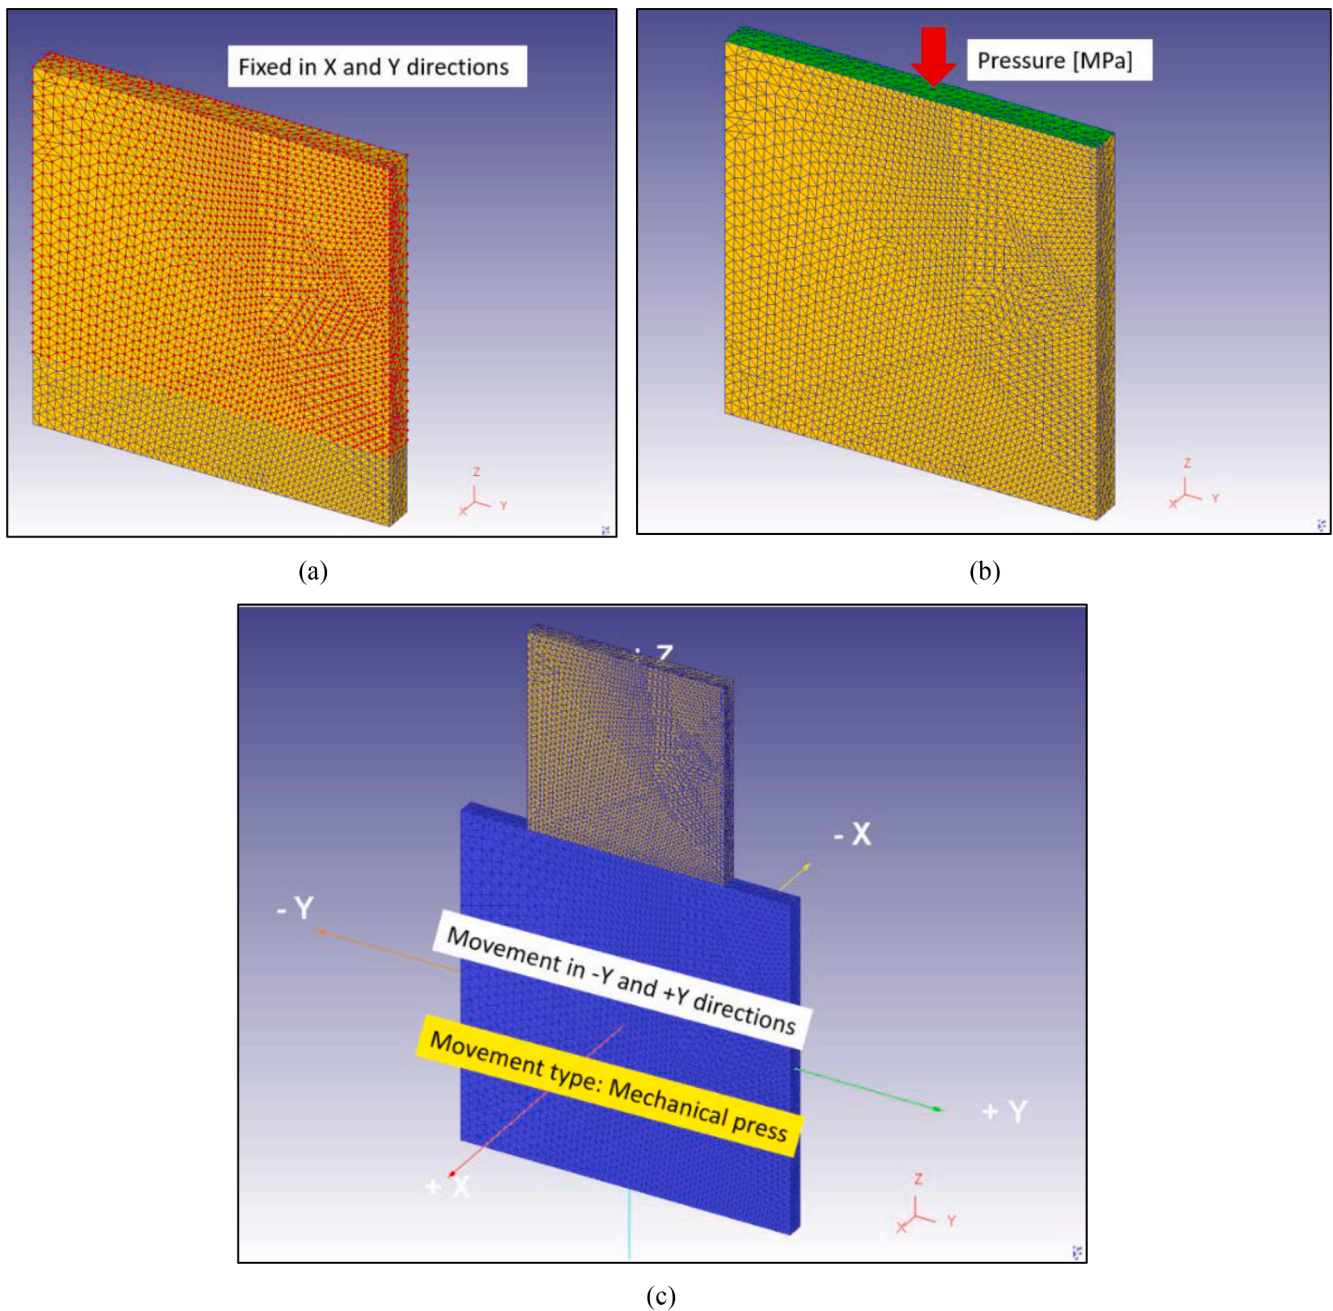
The loads and boundary conditions of (a) the lower workpiece, (b) the upper workpiece, and (c) the assembly and movement of the workpieces.
